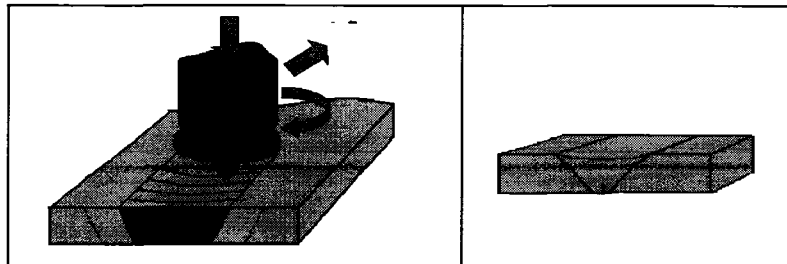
Friction stir welding technology and root crack.
